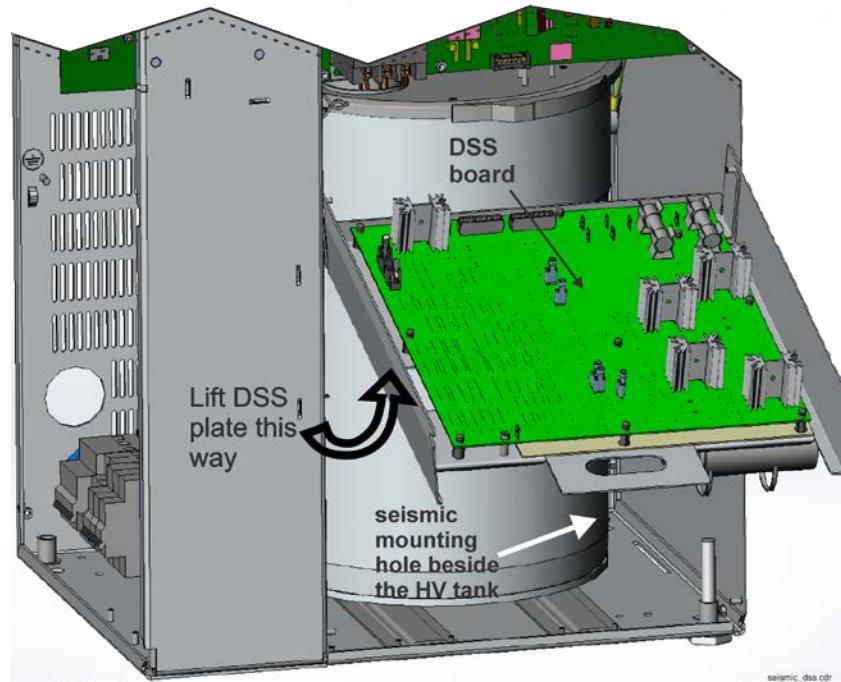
C-4: Lift the dual speed starter board mounting plate upwards to access the seismic mounting hole
